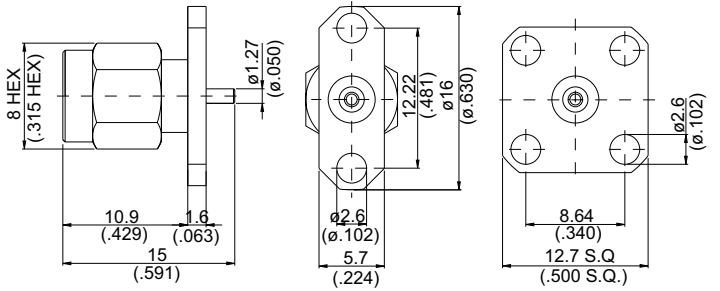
2-hole flange Fig. 2-2:square flange
